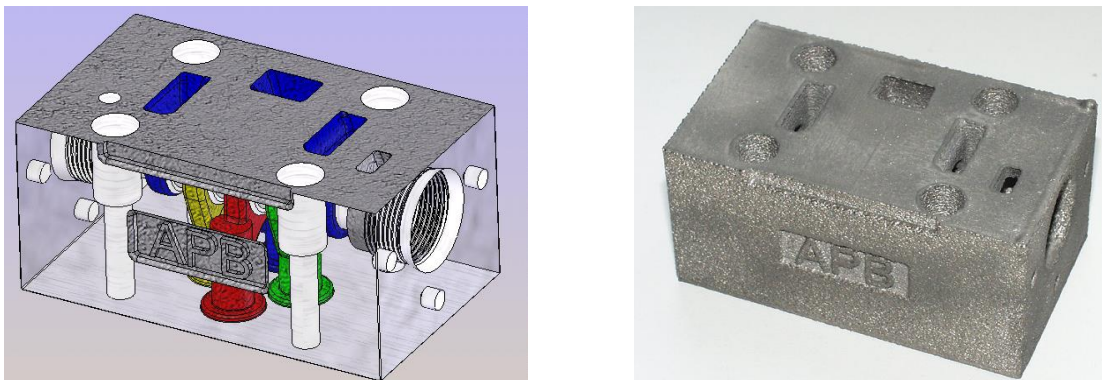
Housing of a directional control valve size NG 6; CAD model (left) and finished product manufactured by the EBM process (right)
